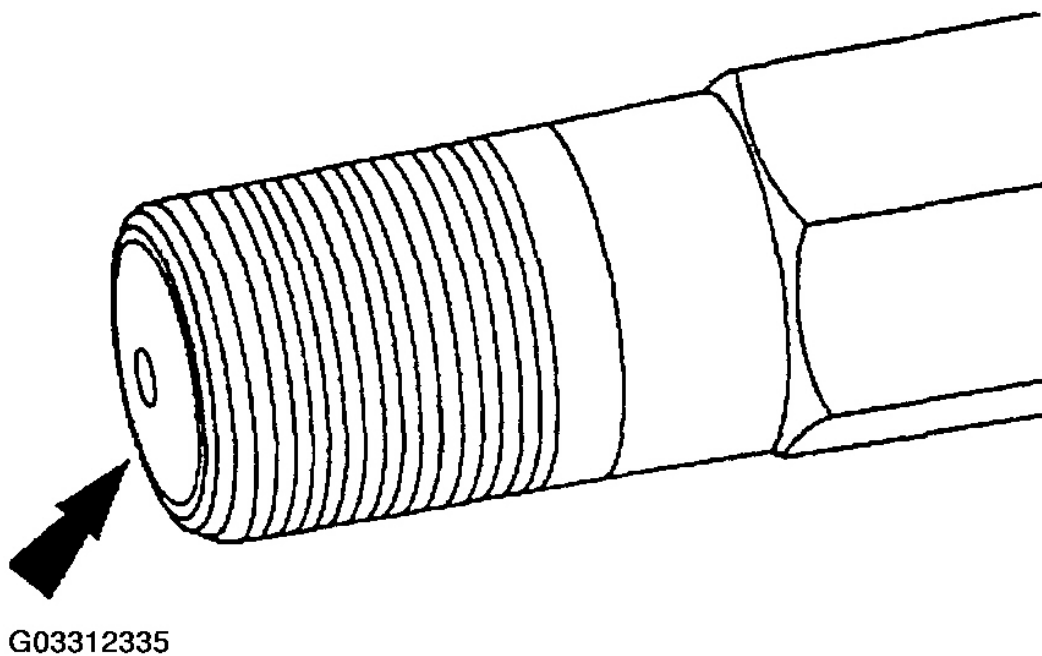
Coating Threads Of Mandrel With Cutting Oil
